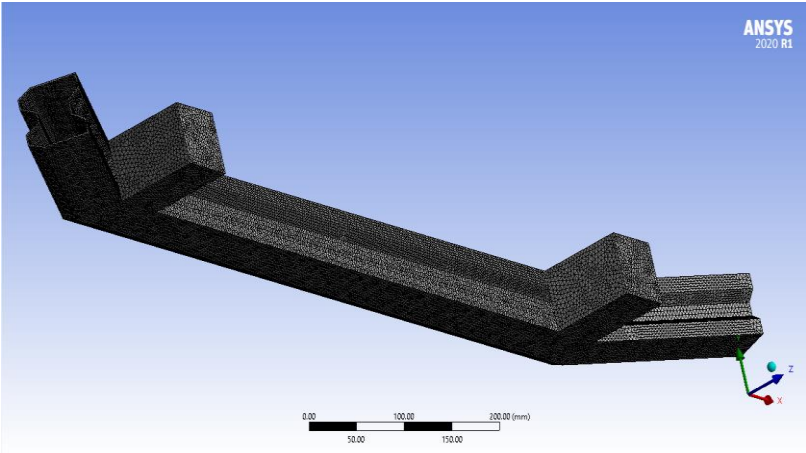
(b) Meshing of Rolled Form Sectioned Bumper Beam
